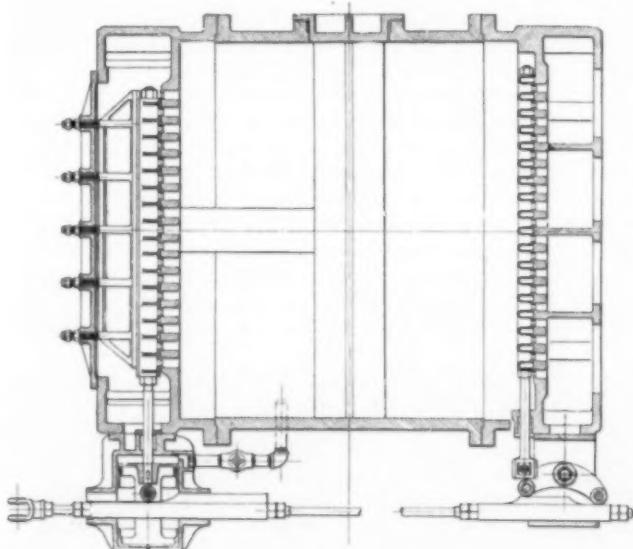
SOUTHWARK AIR CYLINDER SHOWING INLET AND OUTLET VALVES, WITH GEAR
